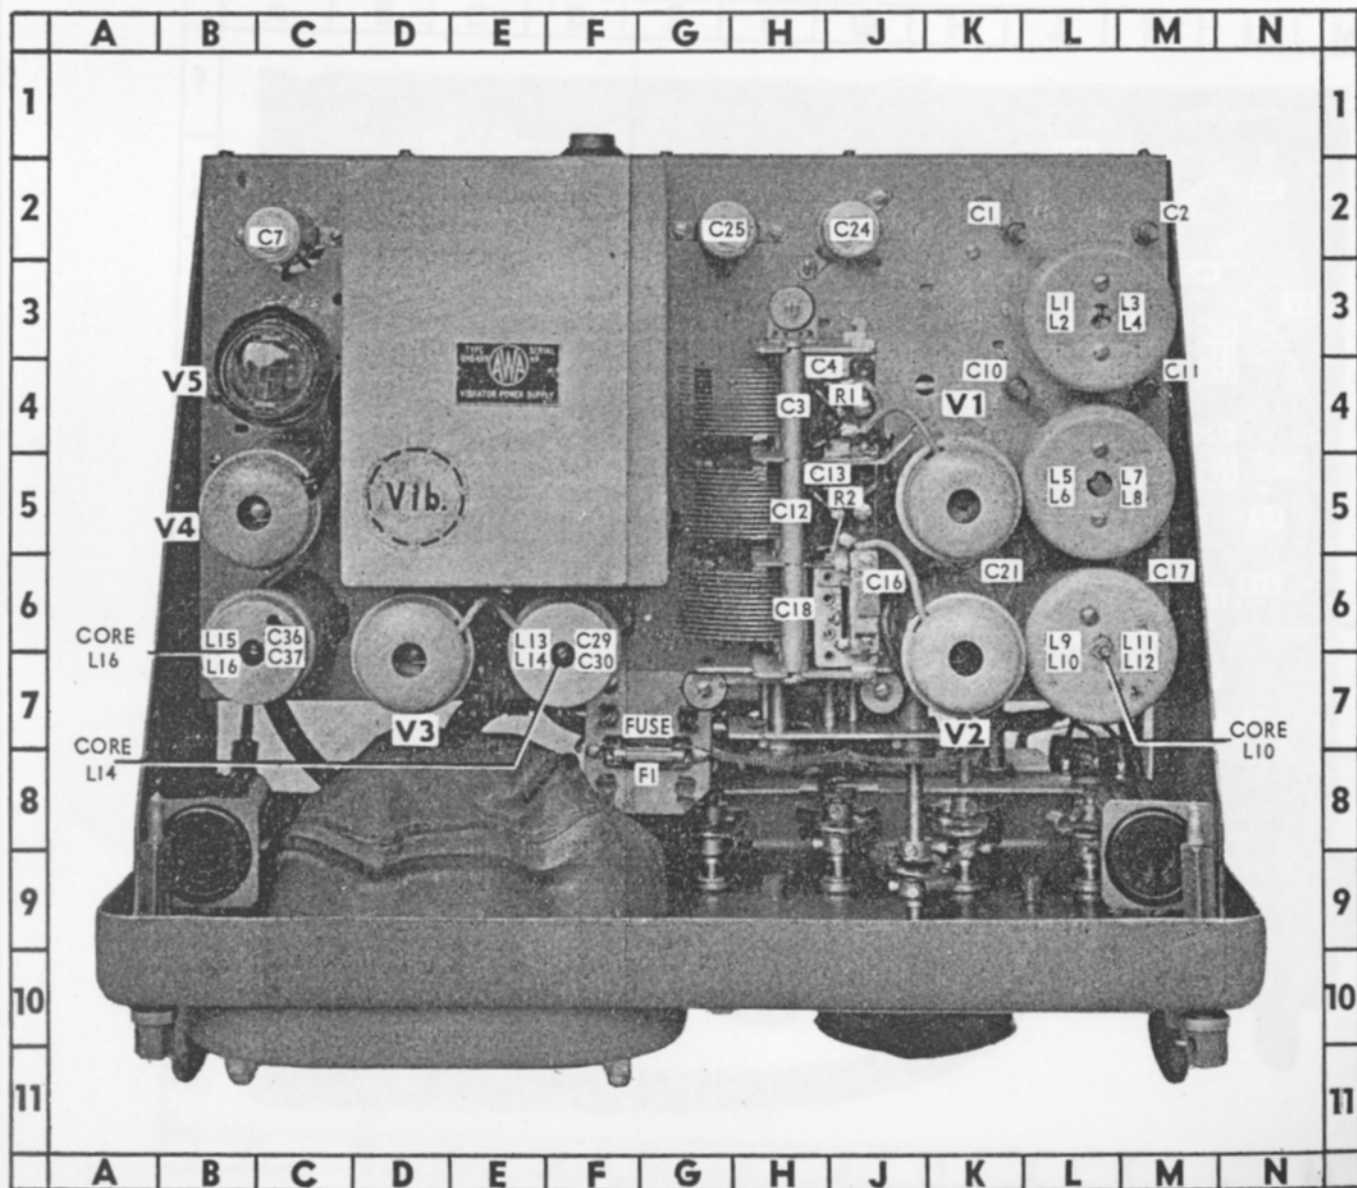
RECEIVER CHASSIS—TOP VIEW.
